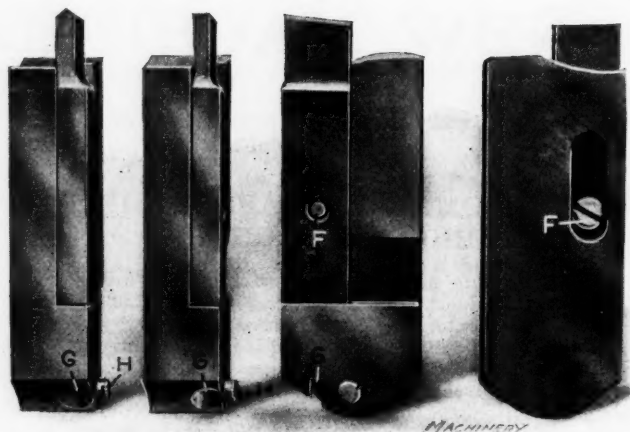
Cutters removed from Head to show Adjusting and Clamping Screws; one Pair of Cutters is Sharp and the other Square
